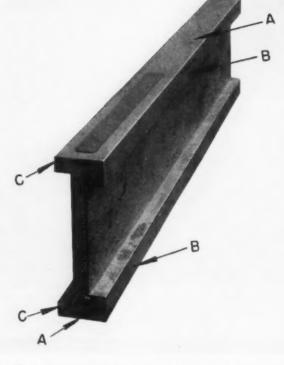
LARGE CRANKSHAFT-LATHE CAM PLATE FLAME-HARDENED (Only requirements were hard wear-resisting qualities on areas A, B, and C. These six surfaces were flame-hardened.)
